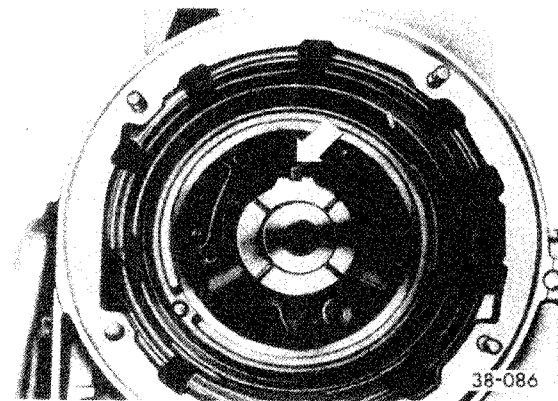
1st/Reverse brake piston/Oil pump, installing
